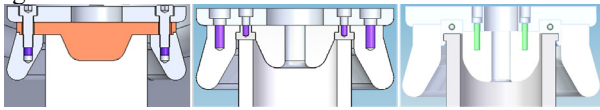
(a) Brazed – solid, (b) Brazed – hollow, (c) Clamped – hollow, outer lip.
